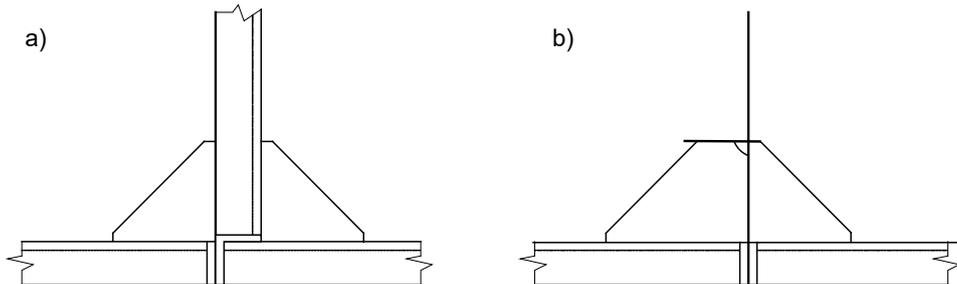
Recommended design patterns for connections of stiffeners to girders, divisions or bulkheads
